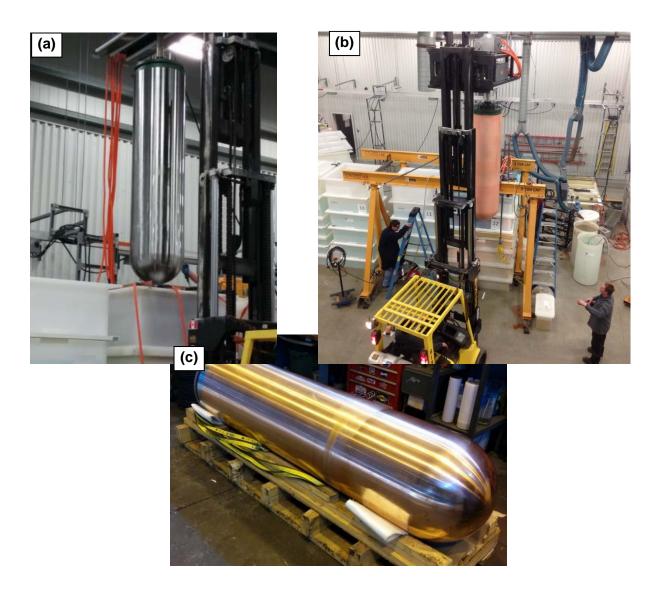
Electrodeposition of Copper on a Full-Sized UFC Lower Assembly : (a) Steel Part Being Immersed into Cleaning Solution; (b) Following Deposition of Initial Copper Layer; (c) Coated and Machined
